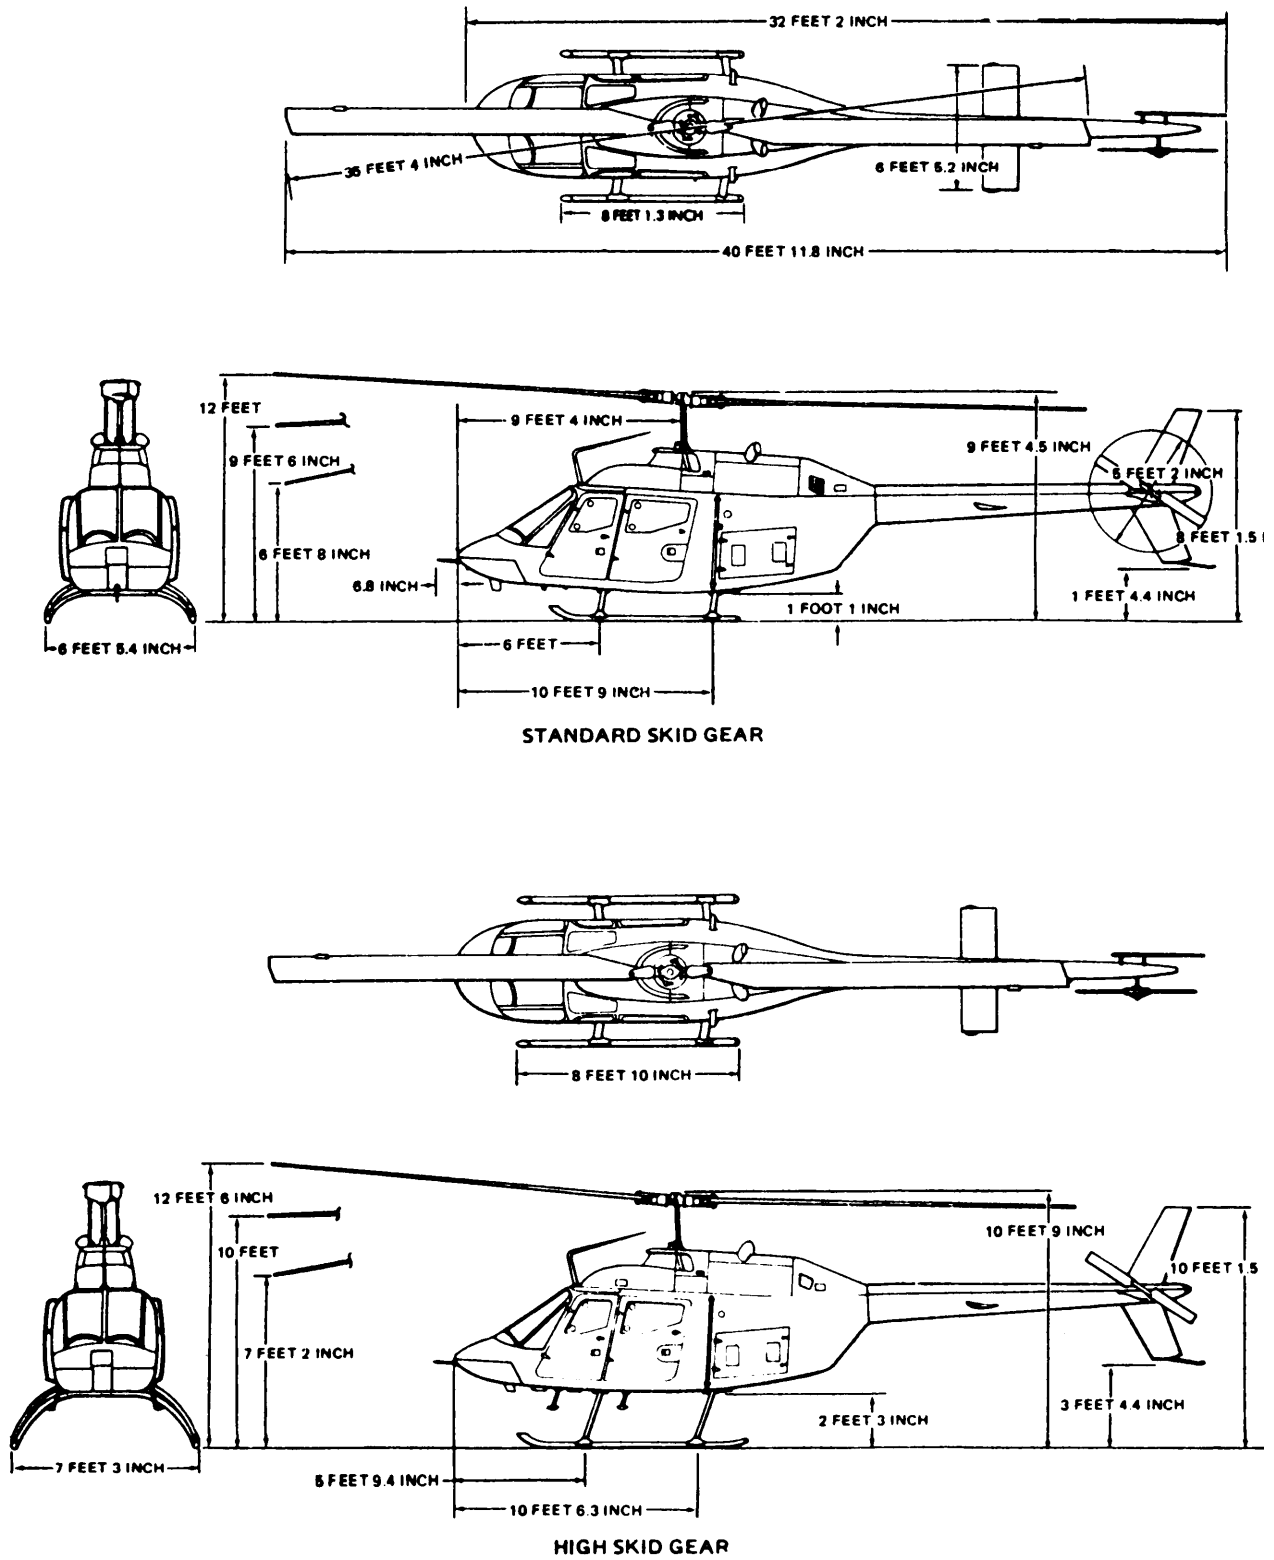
Principal dimensions, OH-58 (front, top, and side views).
